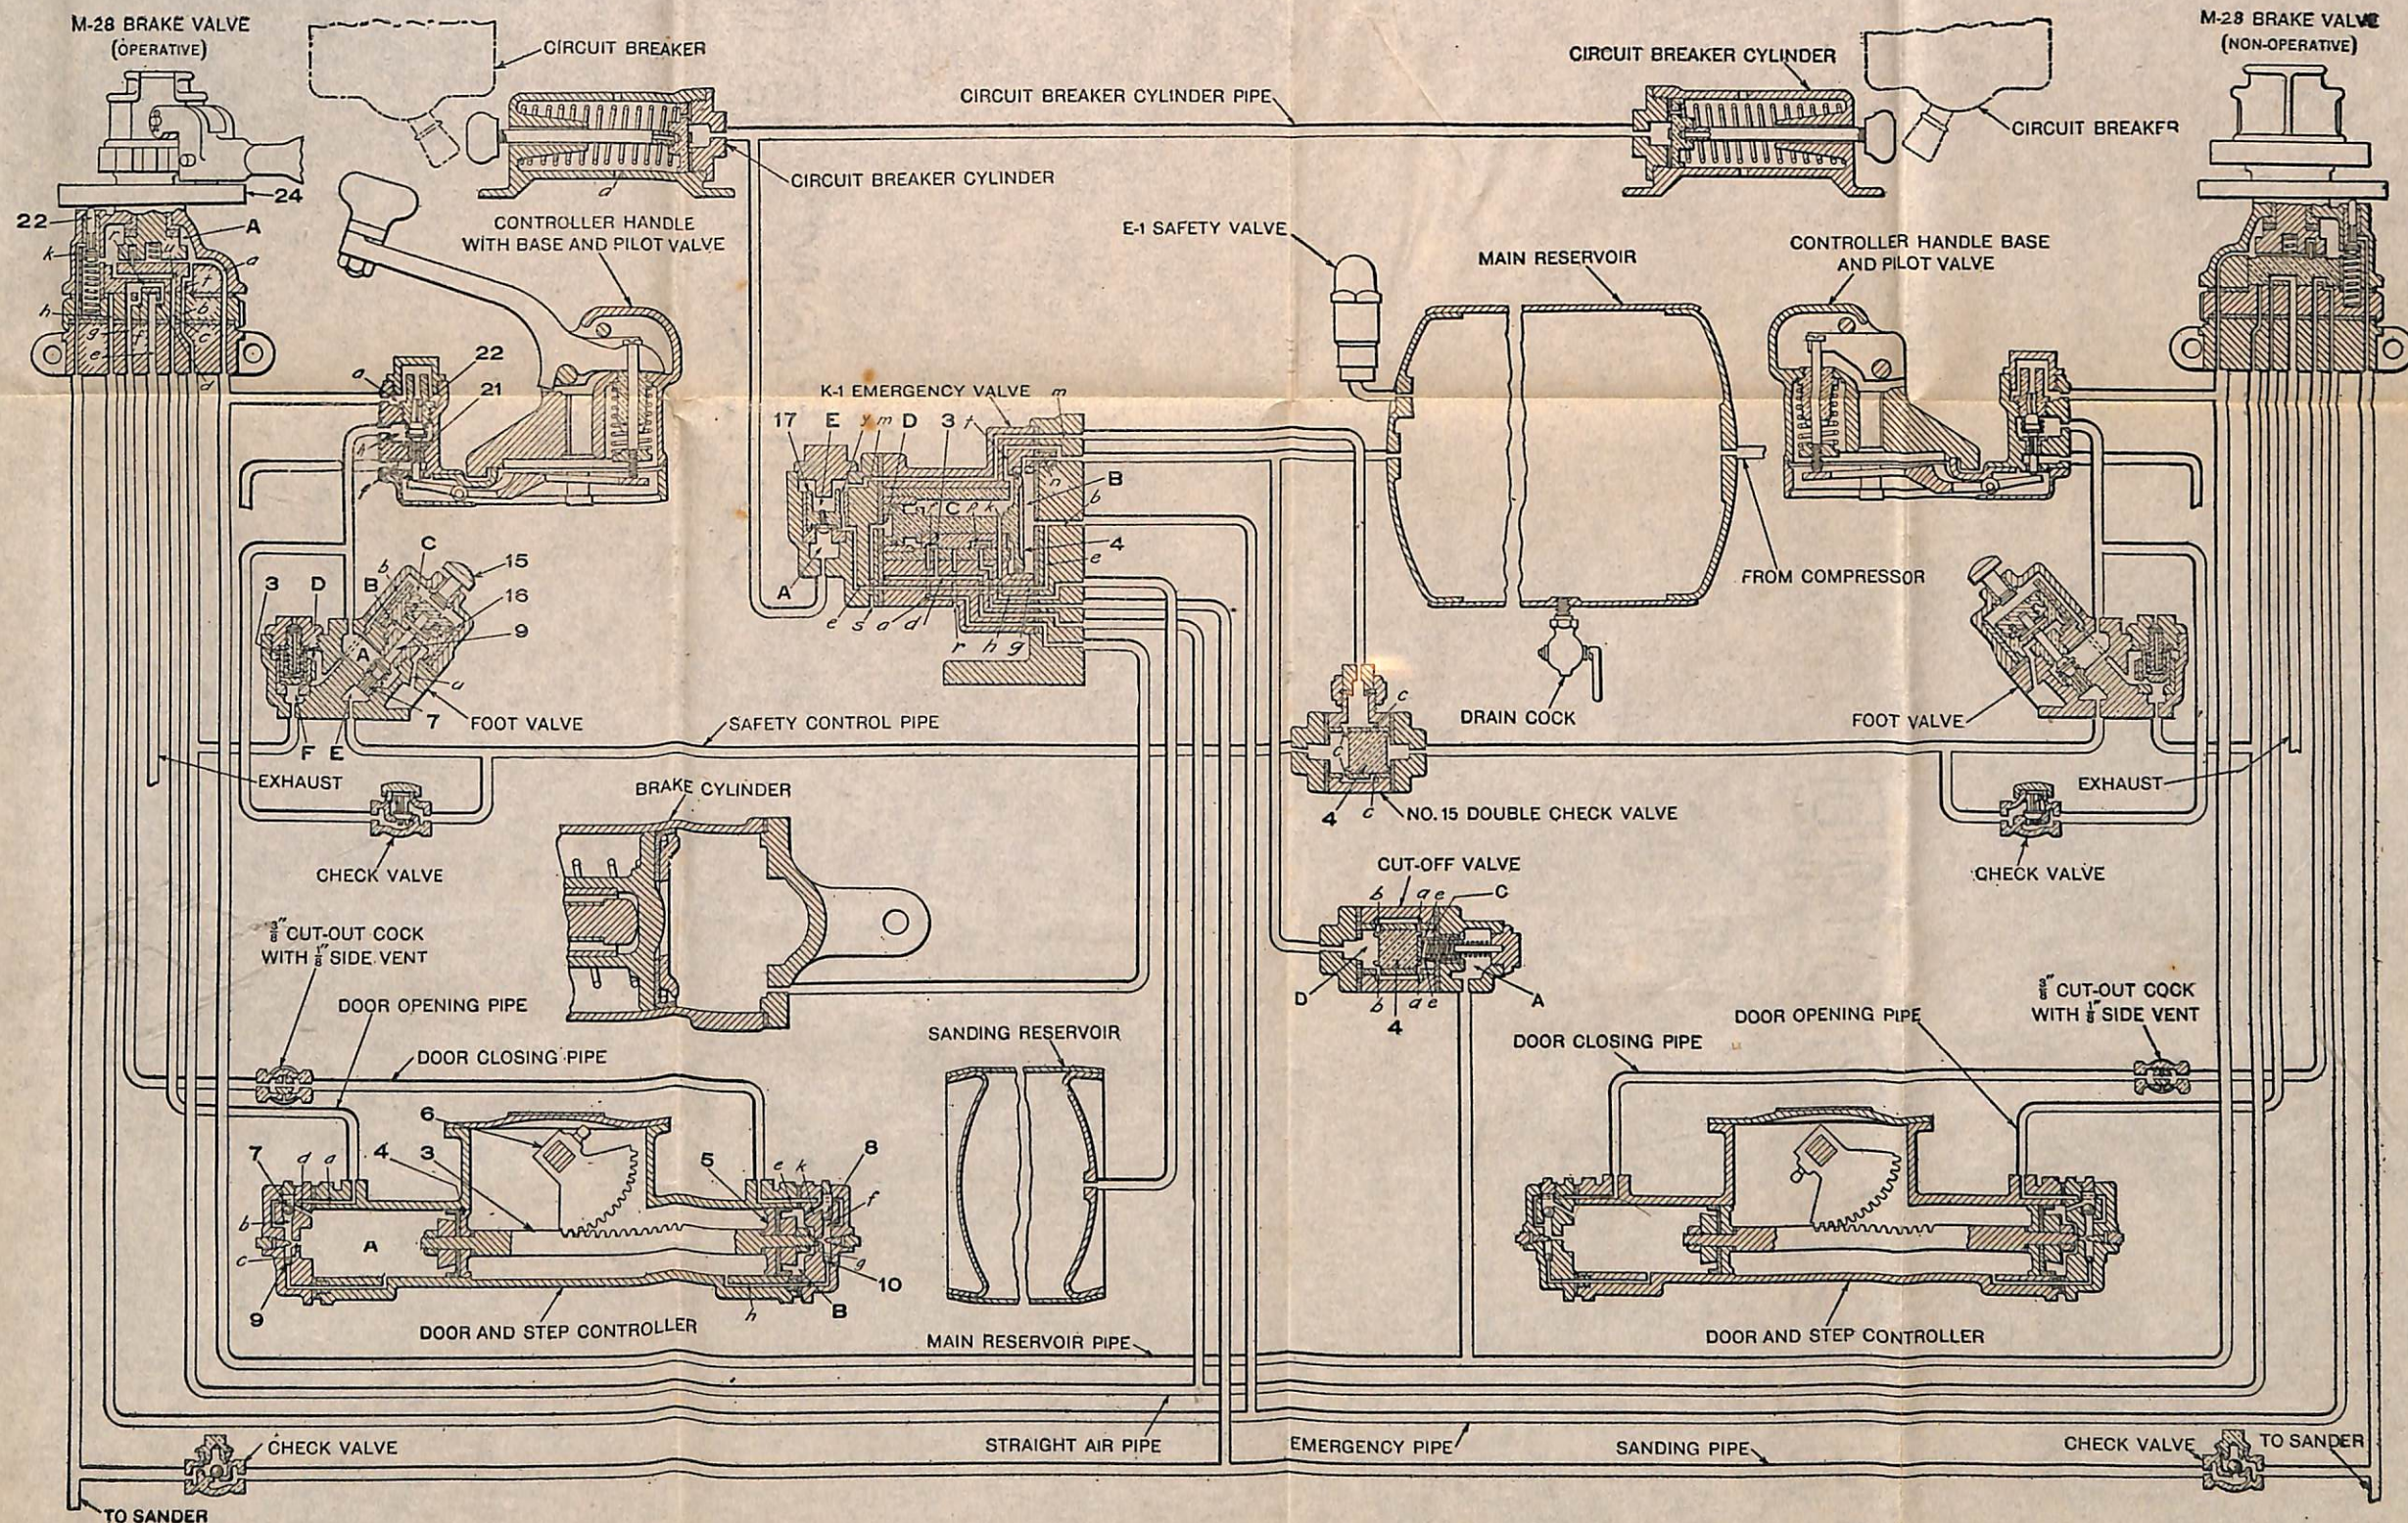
Diagrammatic View of Air Brake and Safety Car Control Equipment
